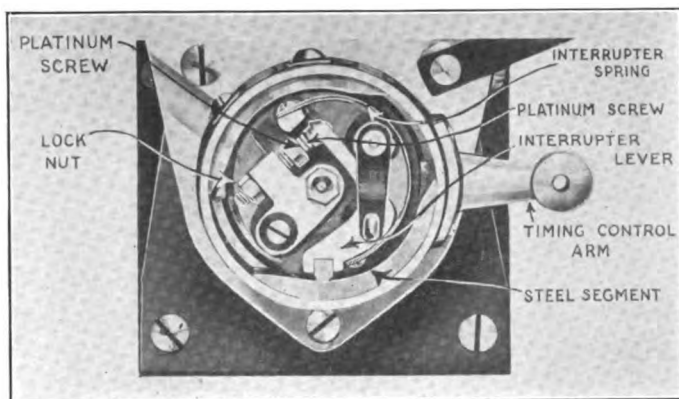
Contact Breaker Mechanism of Bosch DU4 Independent Type Magneto.
